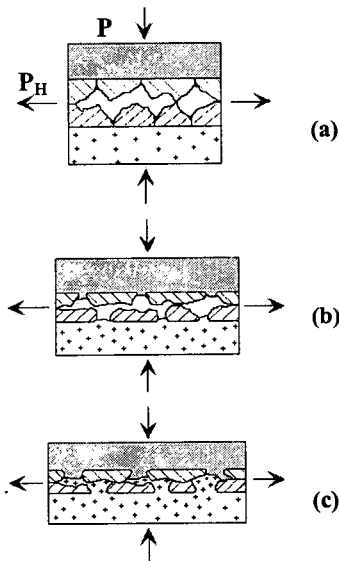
Bonding mechanism in cold pressure welding: (a) original contact shape showing surface roughness, (b) local fracture by microcrack at the contact surface, (c) completion of local extrusion
